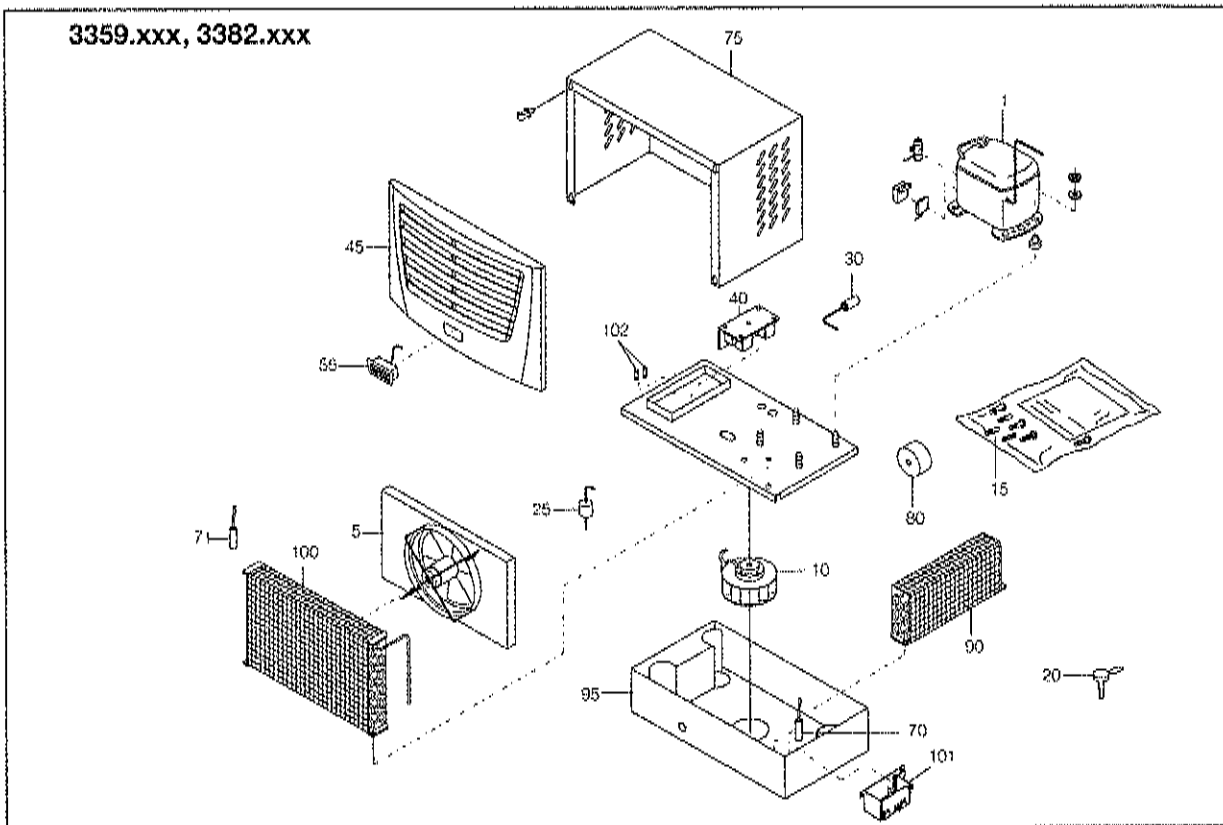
Spare parts for 3359.xxx, 3382.xxx
